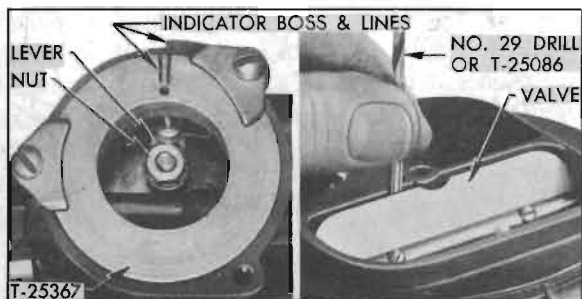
Choke Valve and Vacuum Piston Adjustment
